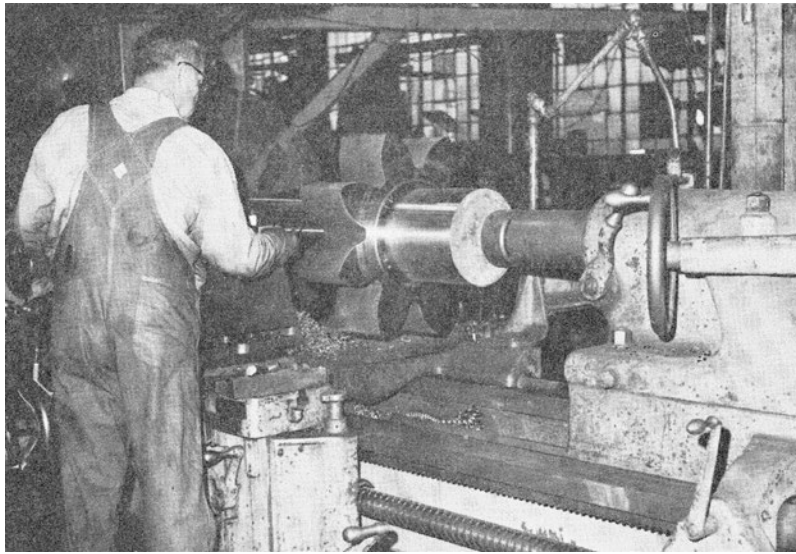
Finishing an 8-tooth pinion, pitch, 21.333 pitch diameter, 6 face width. This pinion was made by torch cutting and is used to drive a giant rack on an offshore drilling platform. (Courtesy of Lufkin Foundry & Machine Co., Lufkin, Texas.)
